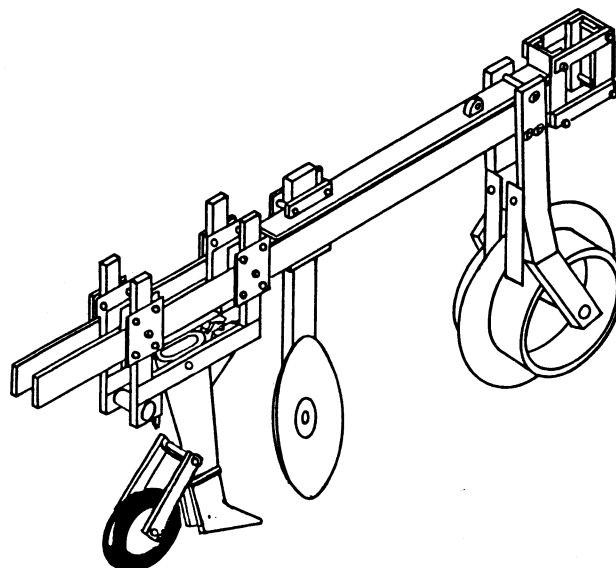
Single drill unit with coulter gauge wheel, 46 cm diameter concave disc to remove atrazine treated soil, spear point hoe opener, and 2.5 x 25.0 cm press wheel.
